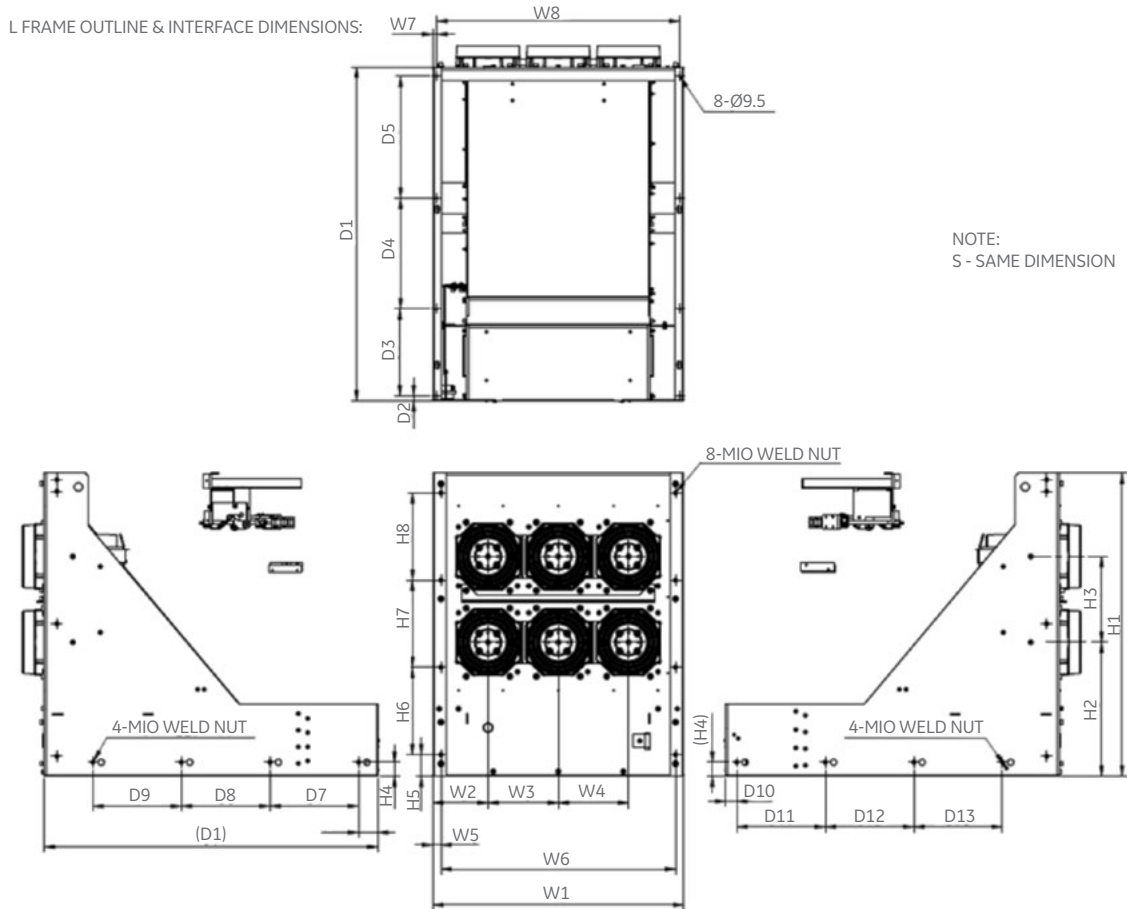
L frame outline dimensions are shown in table with respect to each rating
